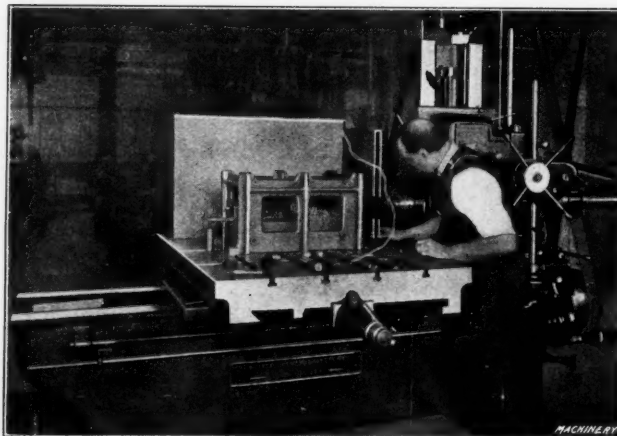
Locating the Spindle in Position vertically for Boring a Hole in a Jig
